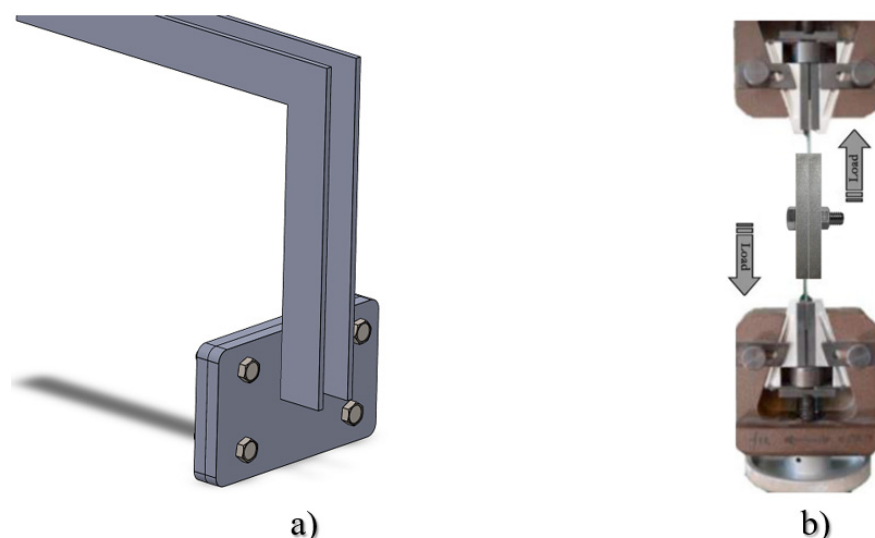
Silencer supports: (a) model and (b) tensile test [38].
